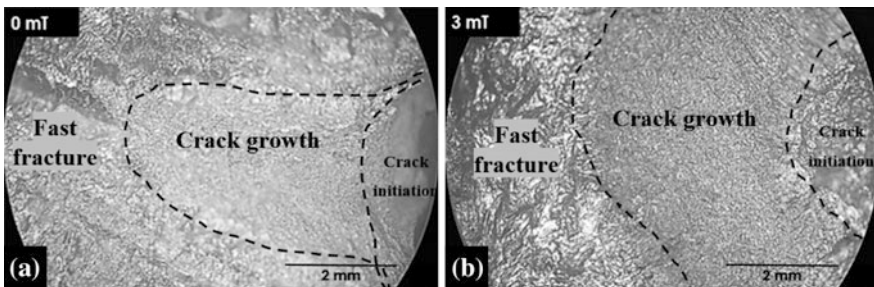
Fracture surface observed with stereoscopic microscopy. a Corresponds to a 0 mT weld condition and b is the 3 mT weld. The dotted lines delimit the different zones of the surface
